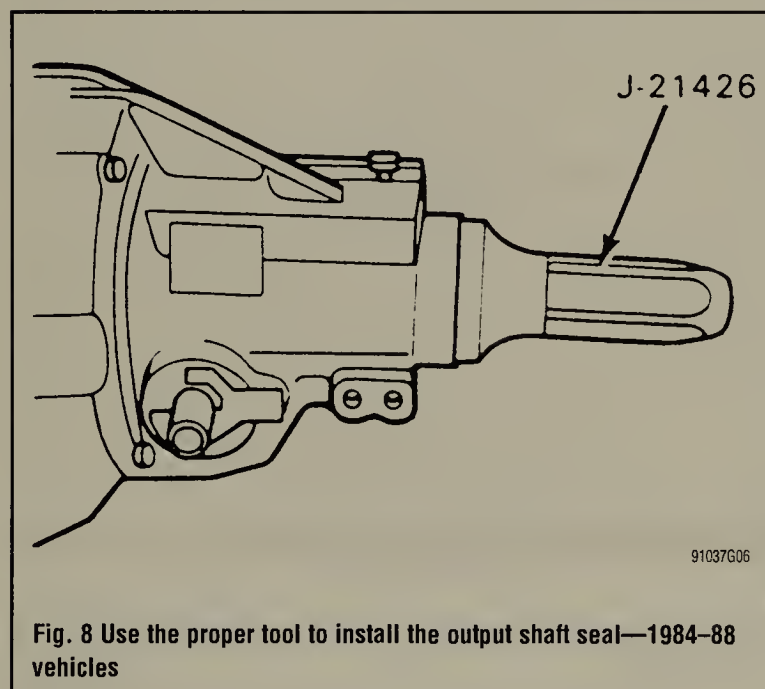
Use the proper tool to install the output shaft seal—1984–88 vehicles
